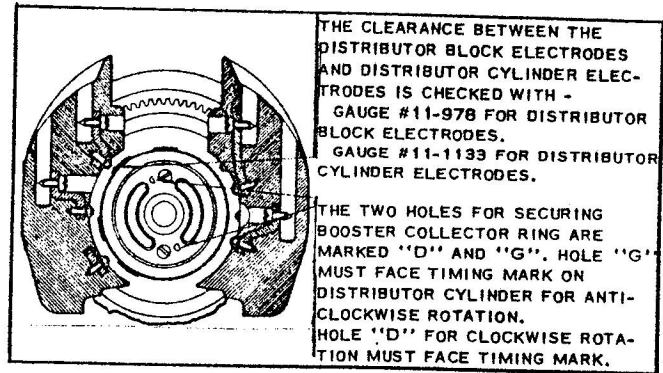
Cross Section View of Distributor Cylinder and Distributor Blocks
